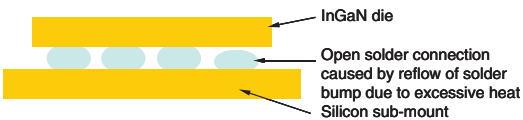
and 20c. Malformed solder connections on silicon submount chip caused by reflow due to extreme thermal overstress.
